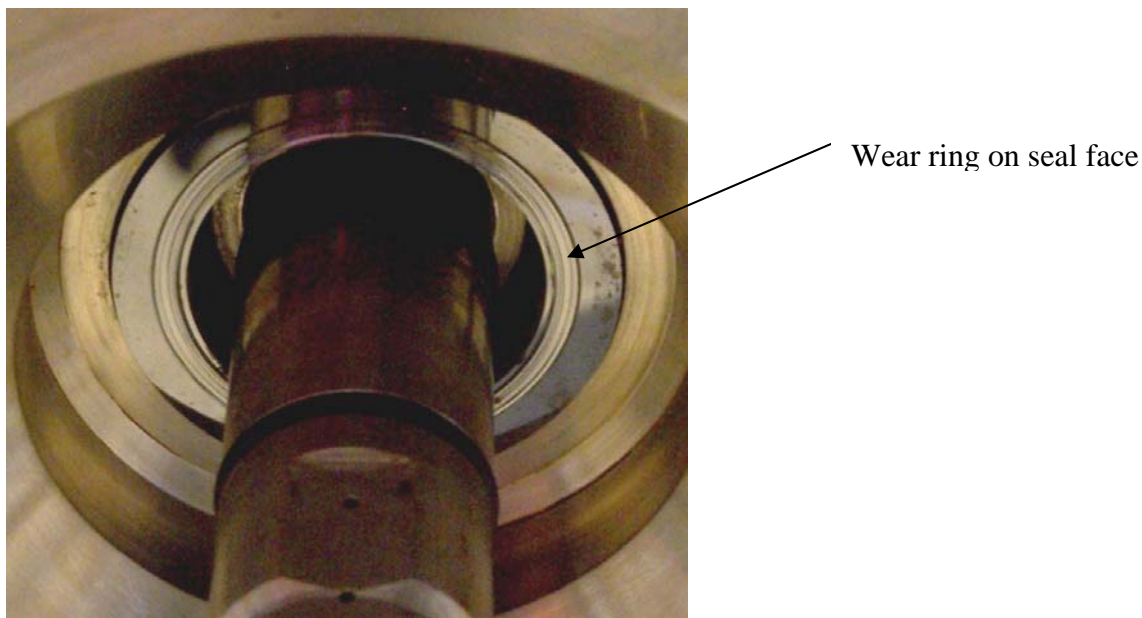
Photograph of the Wear on the Shaft Mechanical Seal Stationary after 120 Hours of Testing
